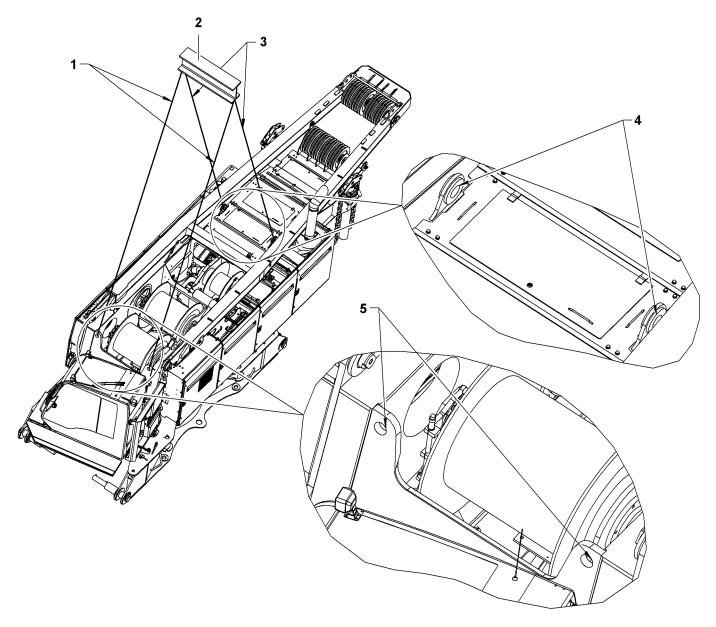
Loading the basic machine without crawler side frame, carbody counterweight and rear counterweight - lifting points
